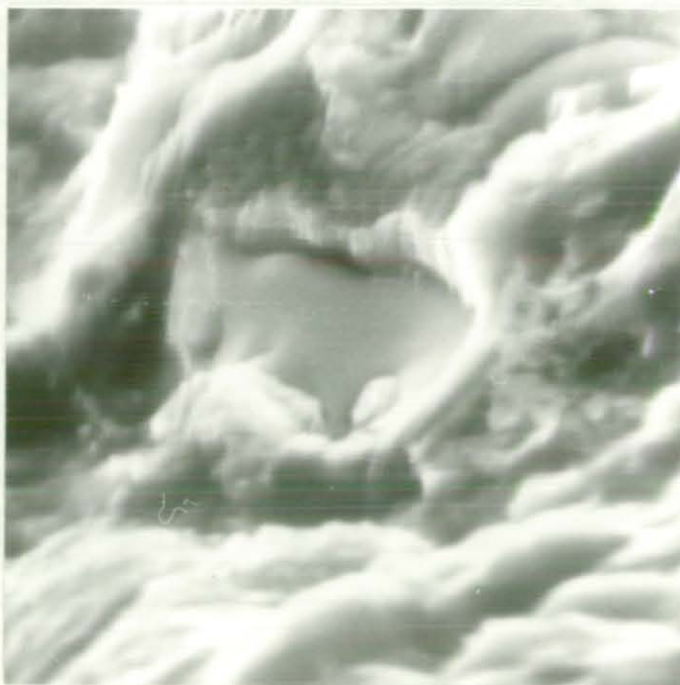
Fatigue fracture surfaces of Al-4.5 Cu/SiC composite
